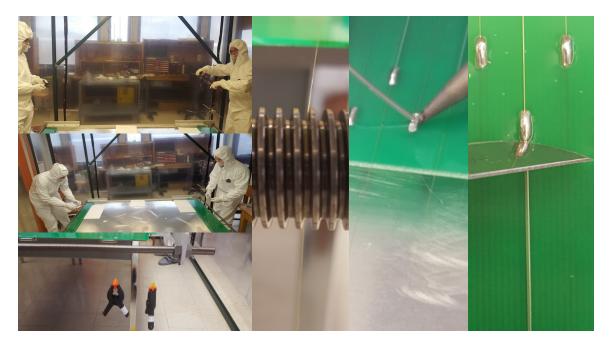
Several major steps of the wire stringing process: unraveling, cutting, and clamping a wire segment, lowering the segment into position, soldering and cutting the wire.
